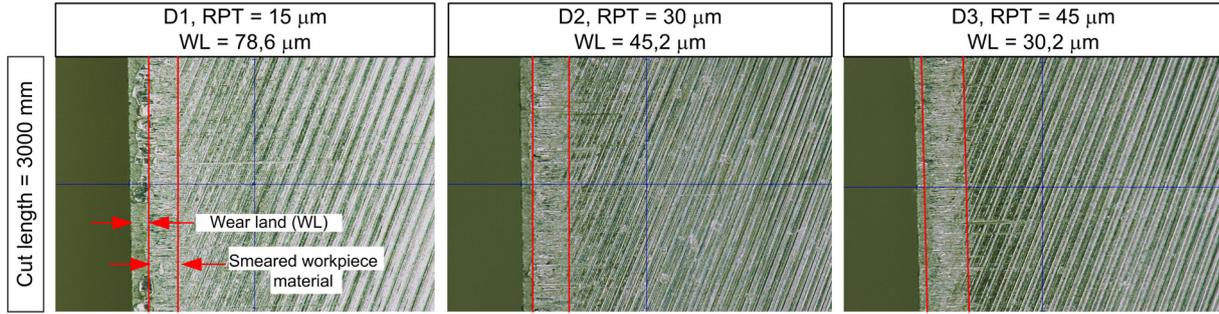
Tool wear for the regarded tools at a cut length of 3000 mm.
